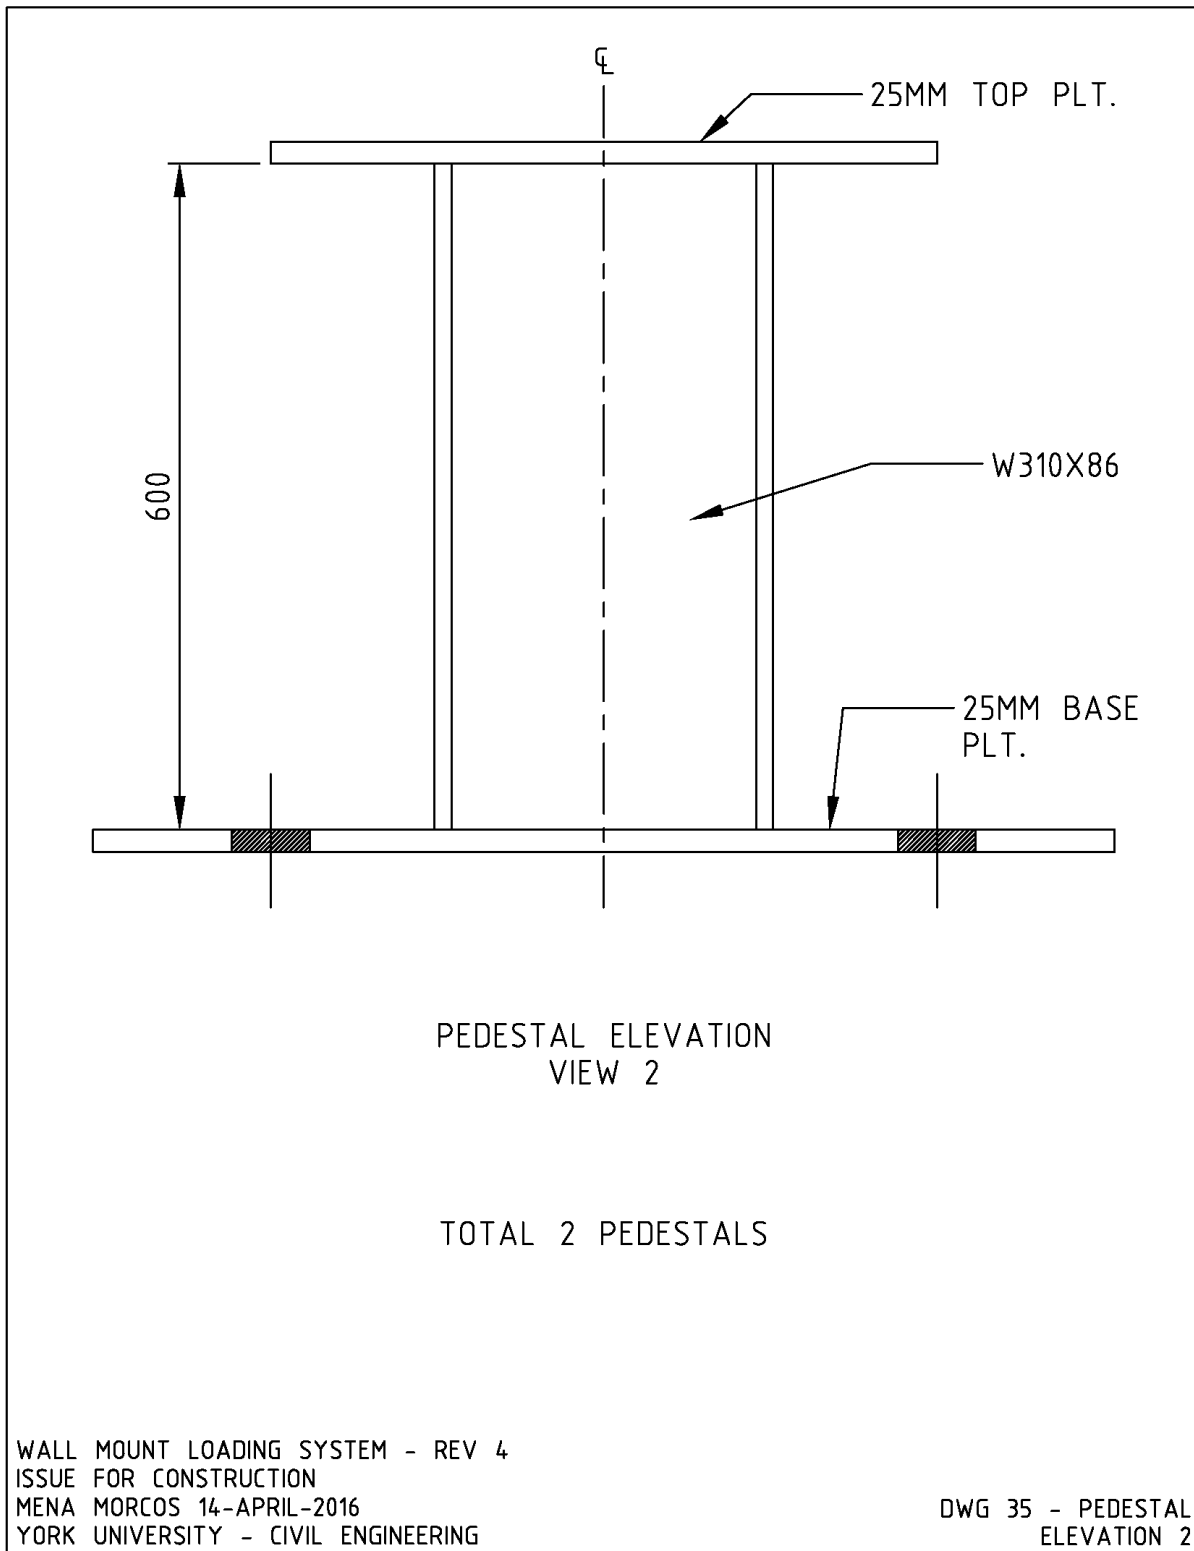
Wall mount loading system design and fabrication drawing – Drawing 35.
